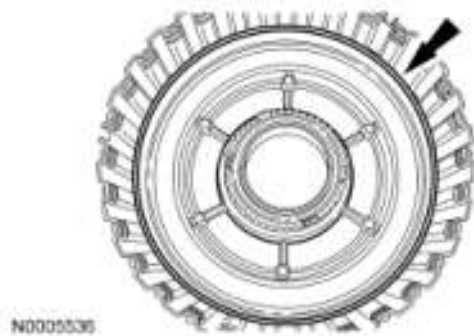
Locating Forward Clutch Piston Into Forward Clutch Drum
